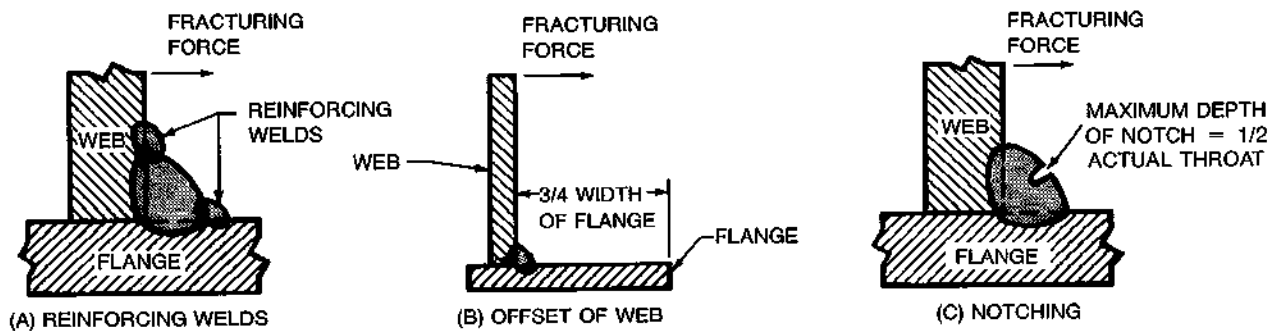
Alternative Methods for Facilitating Fracture of the Fillet Weld
